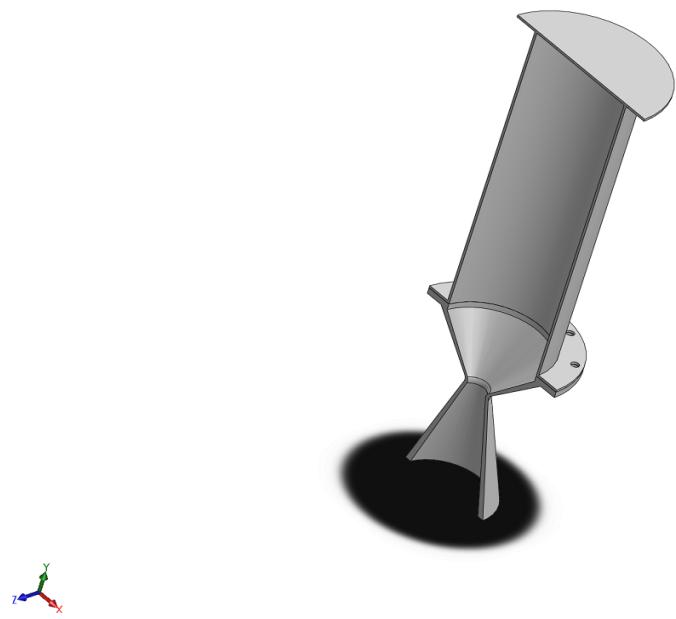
Section View- 3D CAD Assembly of Solid Rocket Motor
